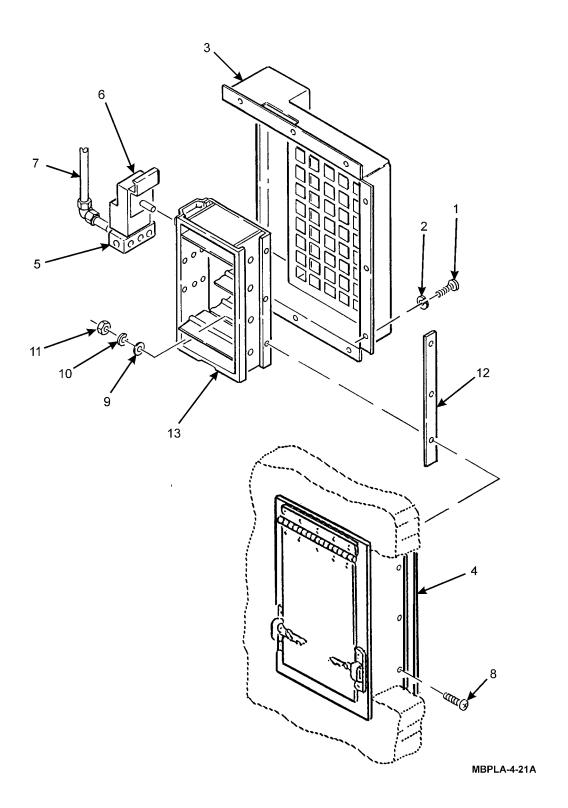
Mechanical Room Purge Exhaust Damper Motor
